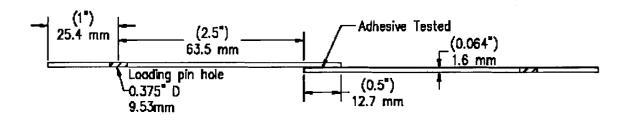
ASTM D 1002 Test Specimen Profile [ASTM 1002]
